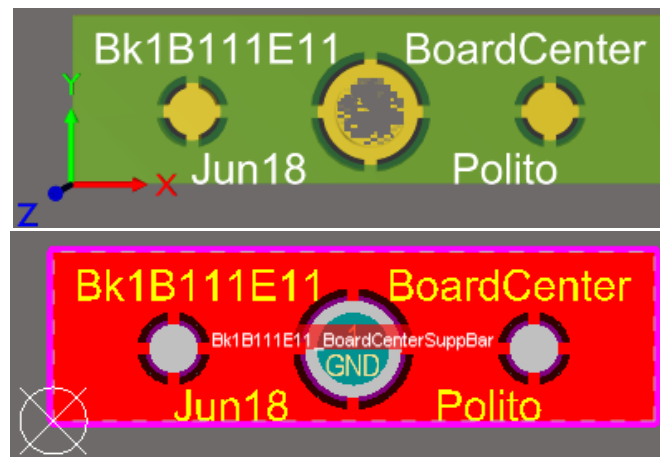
3D and PCB model of Bk1B111E11\_BoardCenterSuppBar.
